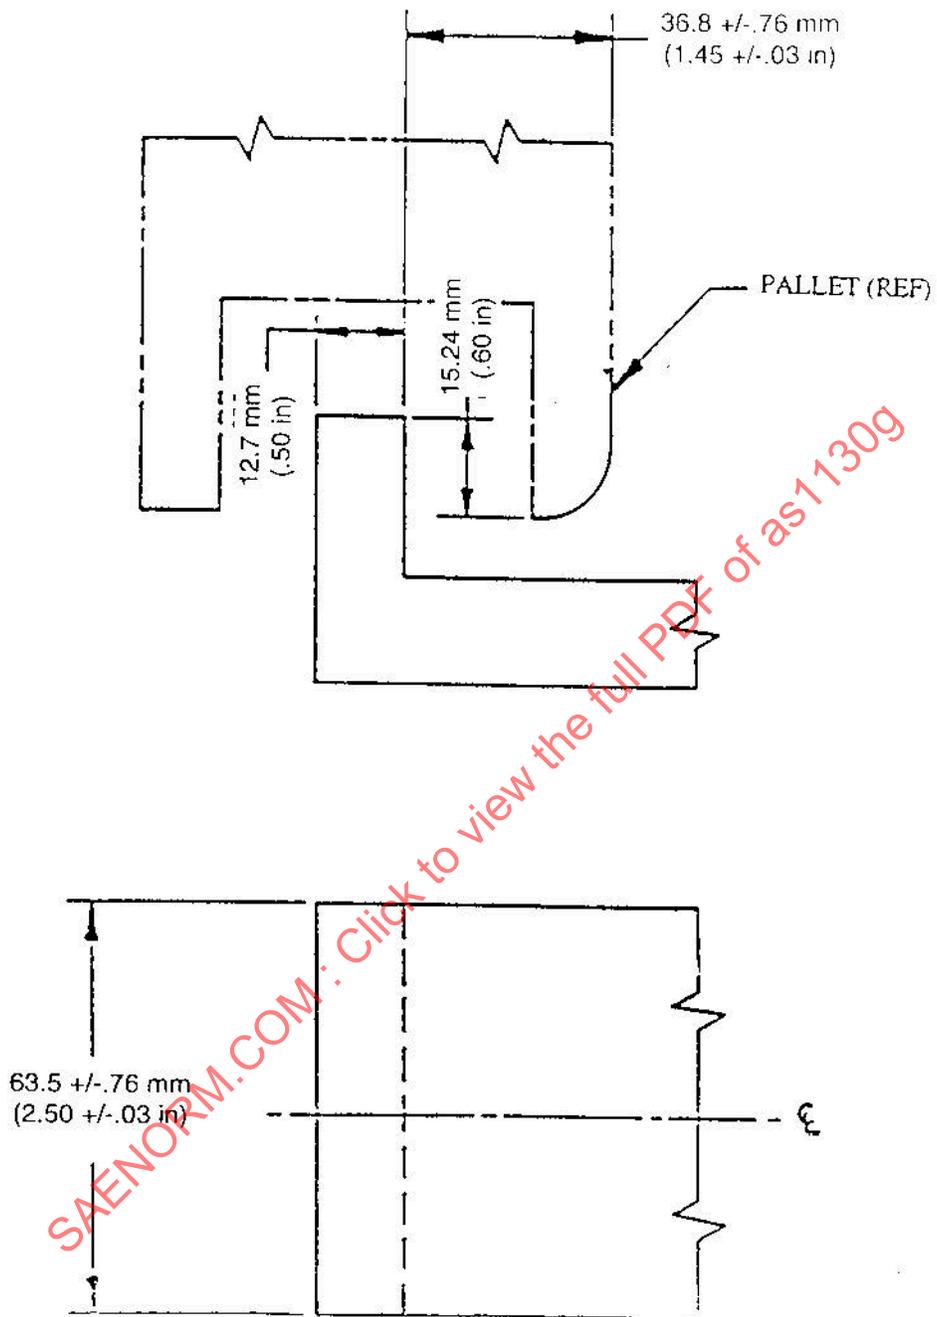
Fore and Aft Restraint Latch Dimensions
